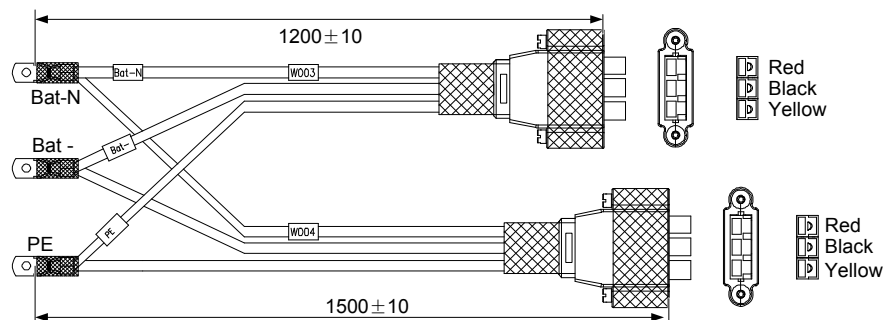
One-into-multiple battery cables 2 (unit: mm)
